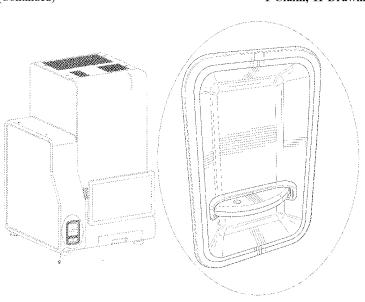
is an enlarged perspective view of detail "9" identified in FIG. 1;
